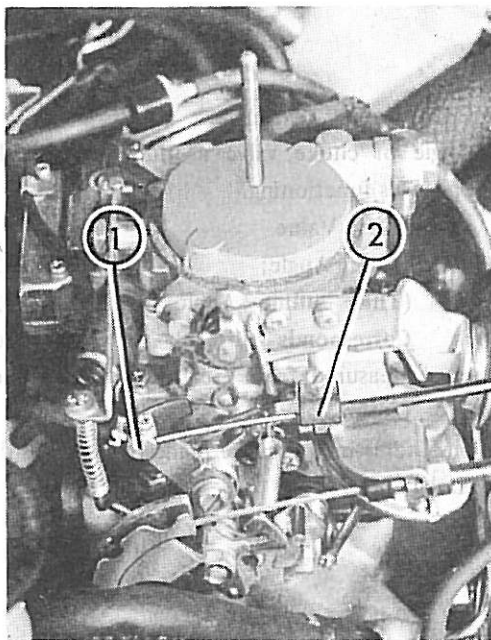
Adjustments of Accelerator and Choke Control Cable
